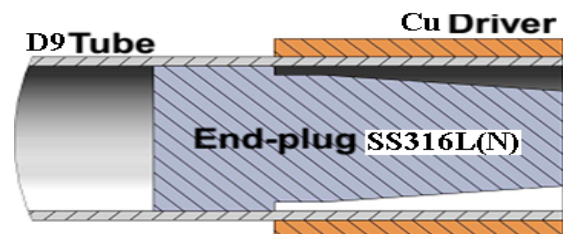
(a) D9 tube to SS316L Sample before weld.
